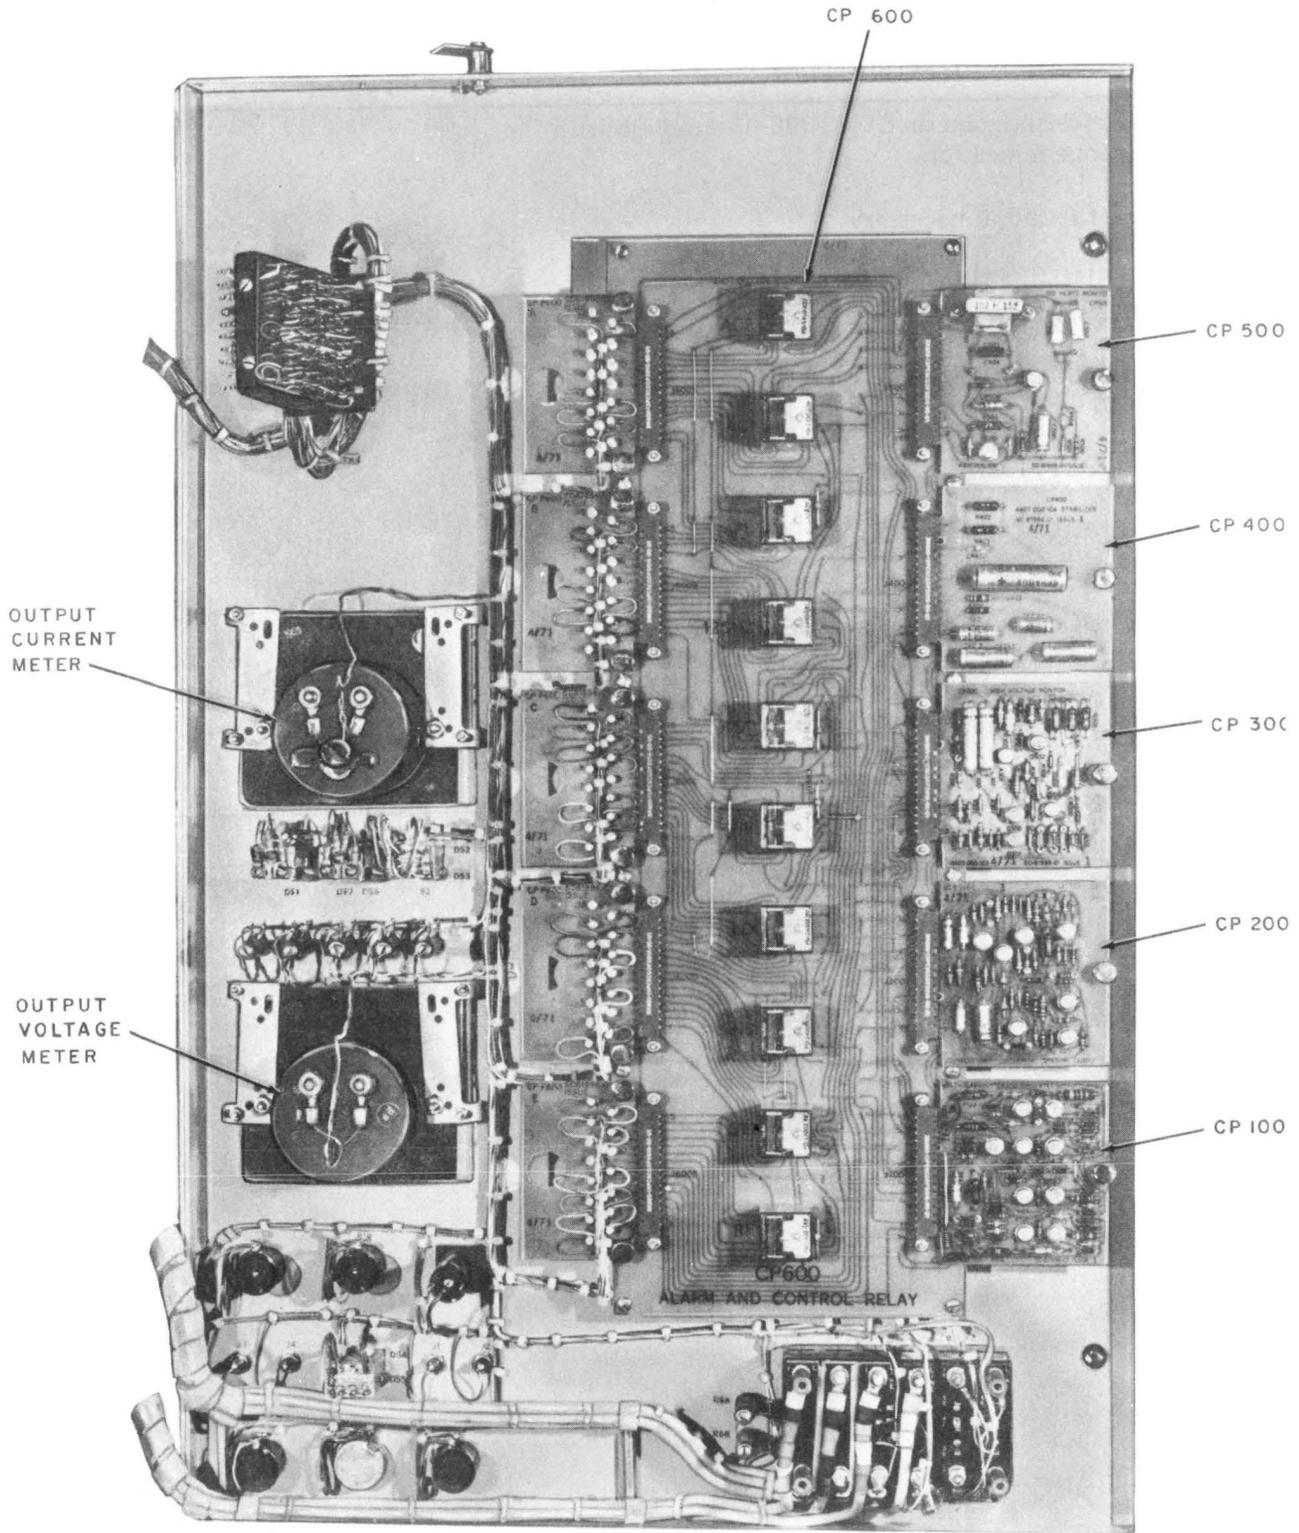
KS-20490 Rectifier Control Panel Rear View
